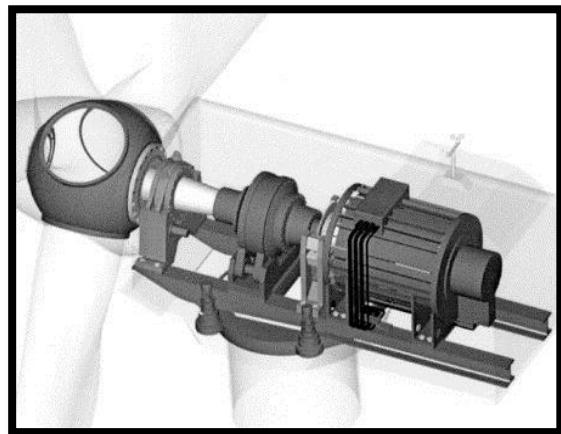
Fully welded bedplate frame design with other components. (2)
